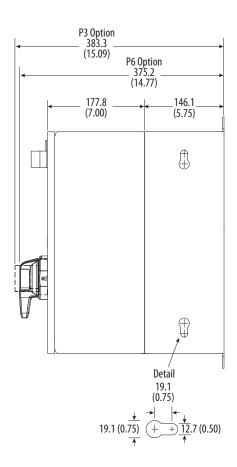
Frame C Dimensions *Dimensions are in millimeters and (inches).
